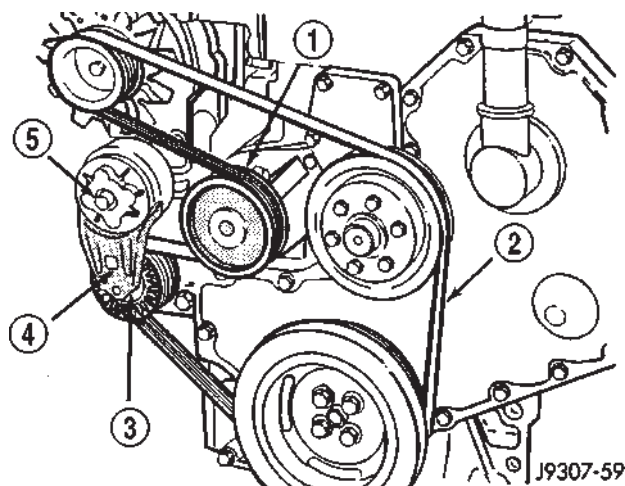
Automatic Belt Tensioner Diesel Engine—Typical
